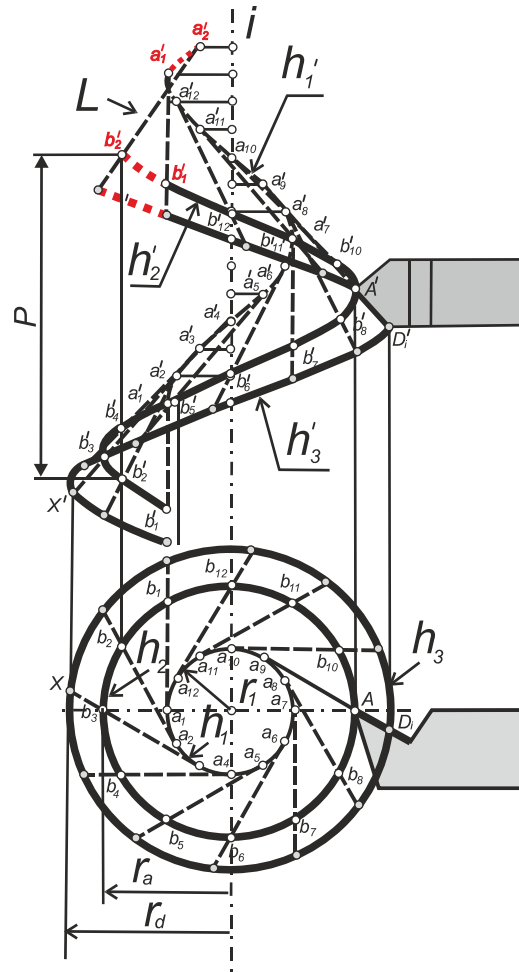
Scheme of execution of a convolute helicoid using a lathe cutter.
